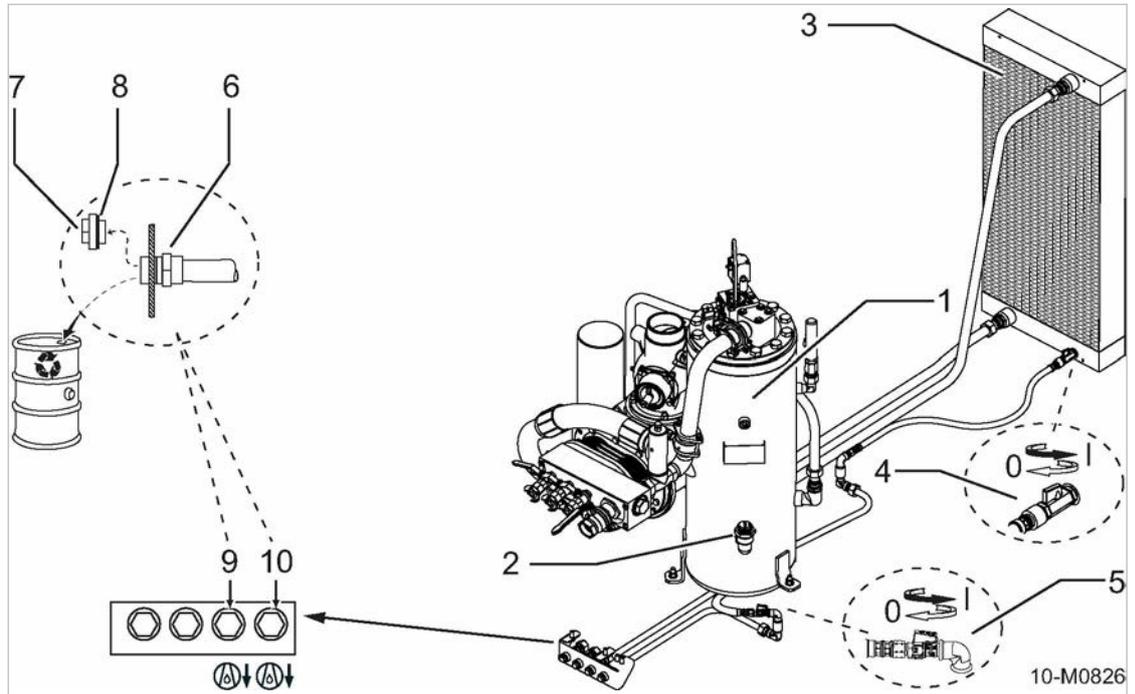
Draining the cooling oil (sealed floor pan - stationary machine)
